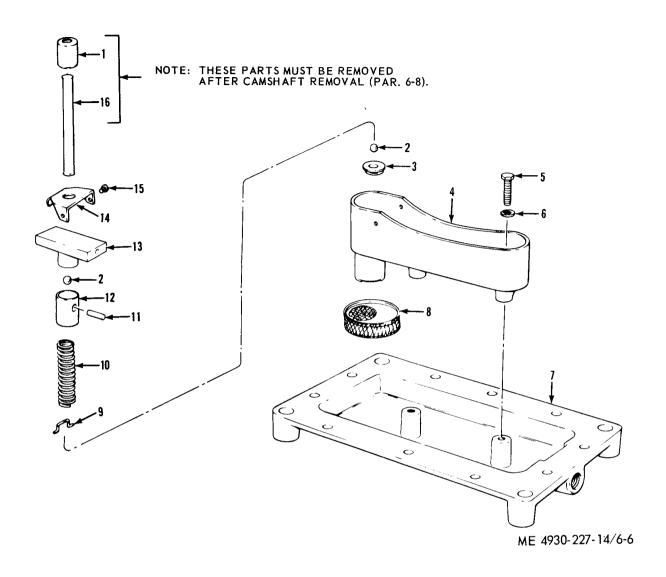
Engine base and oil pump, disassembly and reassembly.
